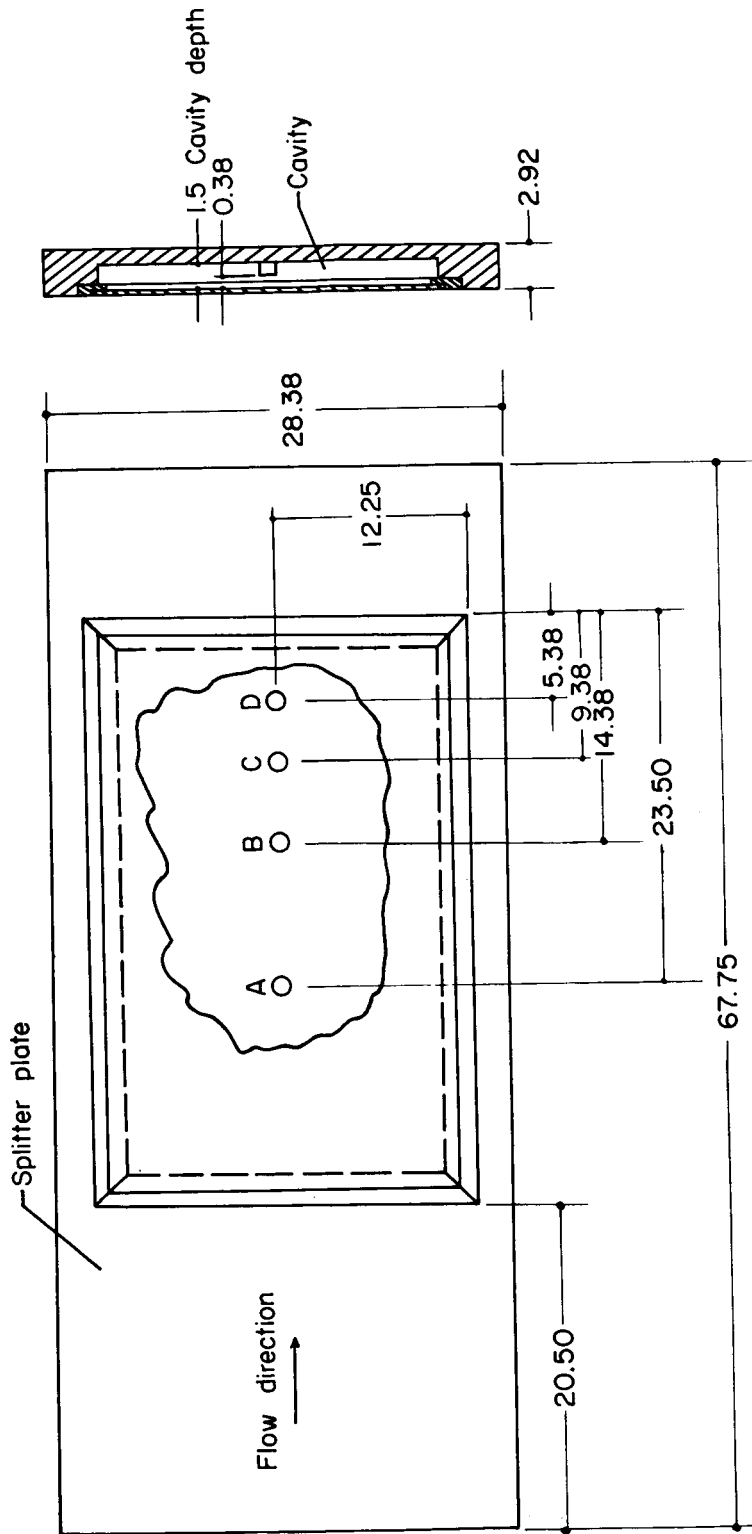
Deflectometer coil locations. All dimensions are in inches.
